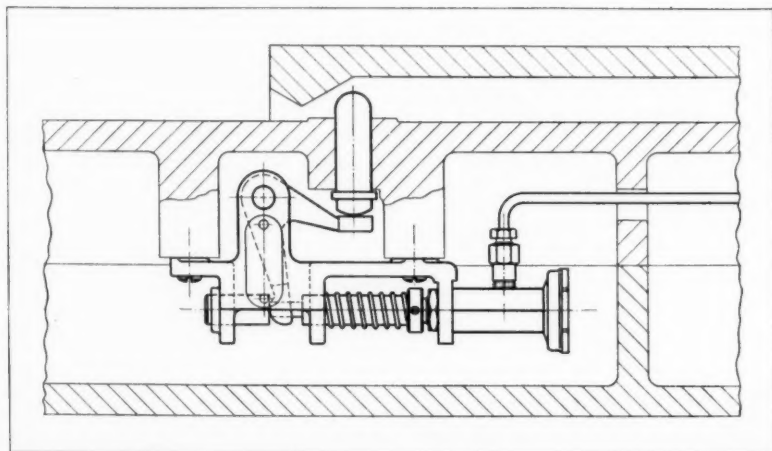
(Lower View) Mechanism that Actuates the Lubricating Pump on the Broaching Machine
